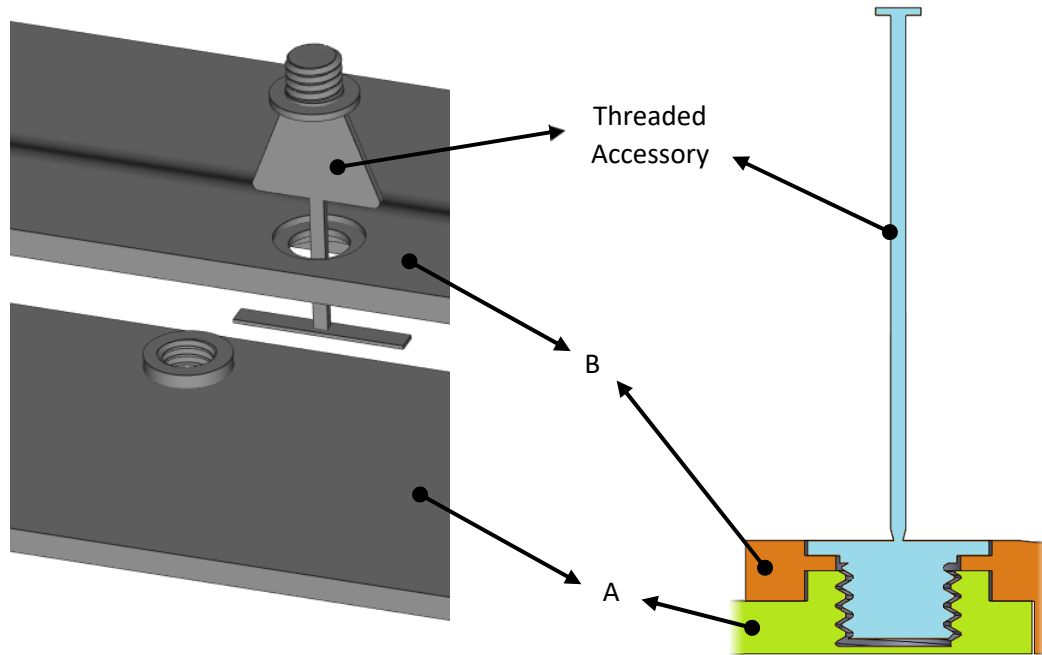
Left: design to be printed. Right: Cross section of the union once assembled.
